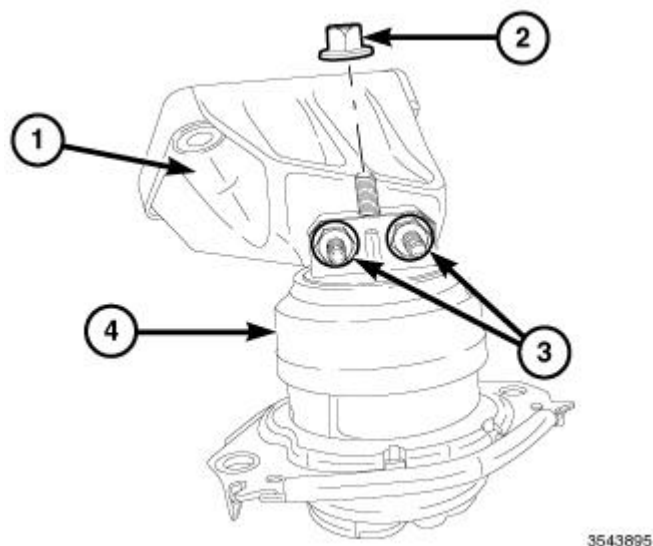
Engine Mounting Bracket, Engine Mount & Fasteners
